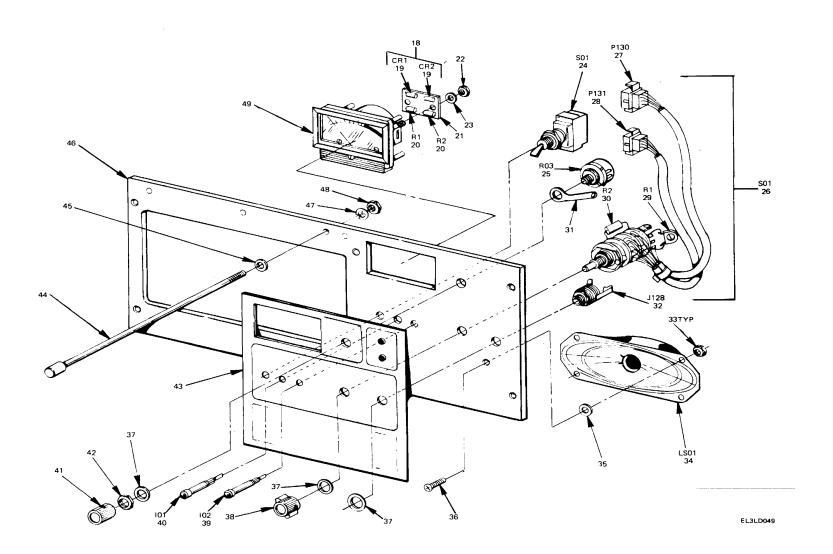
Electronics Package Assembly (Sheet 1 of 2) 11
